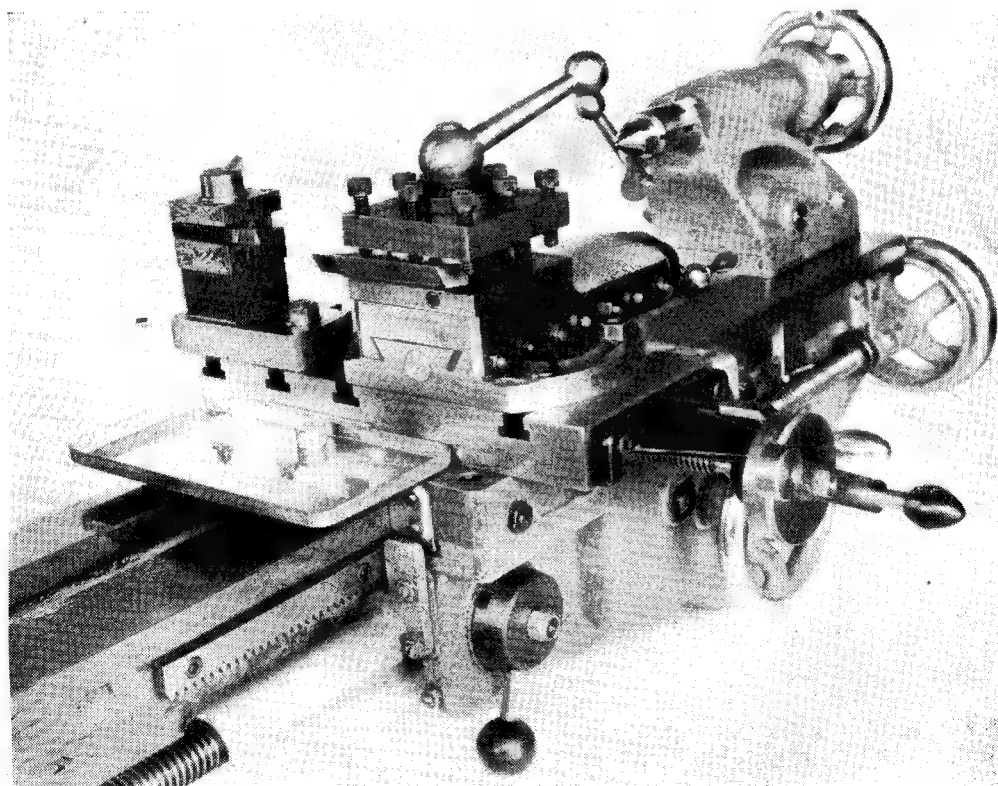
Showing the saddle chip tray and the plug fitted to the top-slide turret: the short clasp-nut lever: and an additional top-slide bolt
